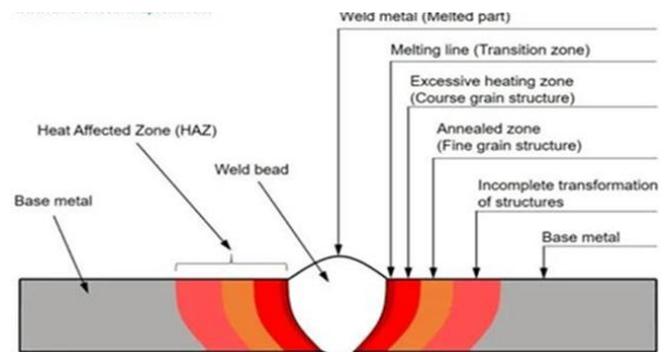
Welding zones consisting of Weld Metal (WM), Heat Affected Zone (HAZ), and Base Metal (BM).
